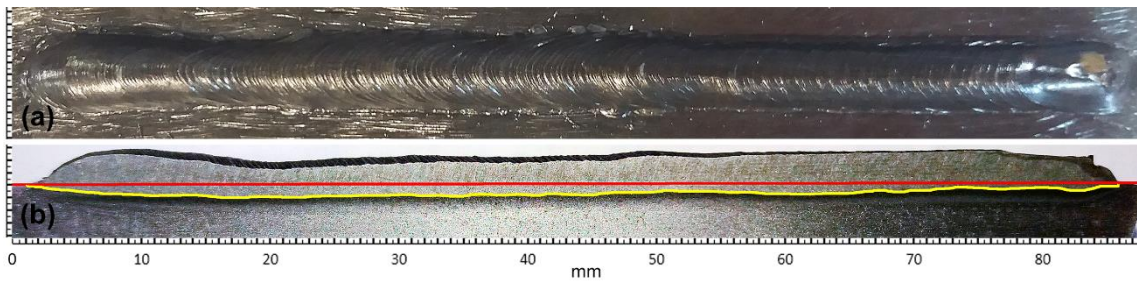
Weld bead obtained in the experiment 2: (a) Top view of the weld bead; (b) Weld bead depth profile (yellow line) and surface of the workpiece (red line) obtained by the macrographic analyses algorithm.
